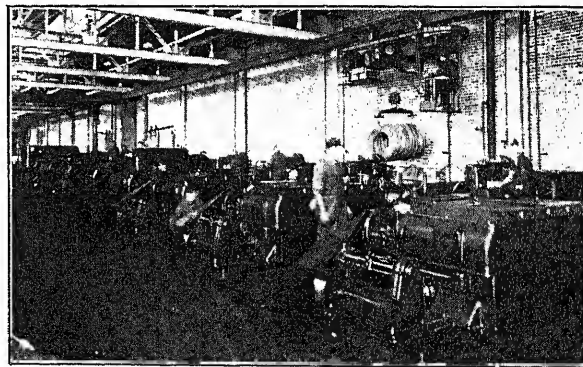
BATTERY OF NO. 1 WIRE-DRAWING MACHINES
